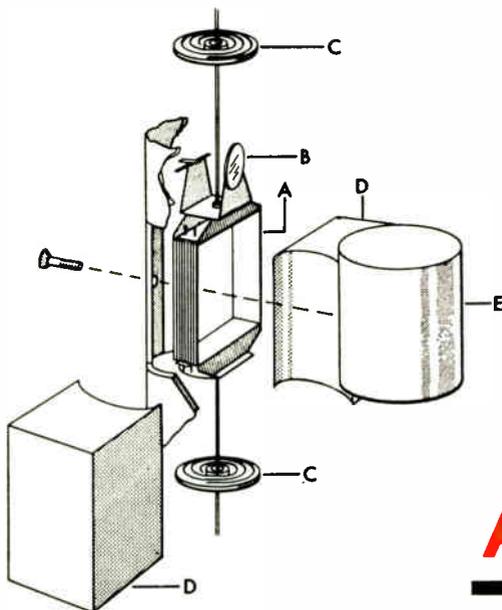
Cut-away view of a bifilar meter movement showing the basic parts used. (A. Moving coil; B. Mirror; C. Disc spring; D. Pole piece; E. Core.)
